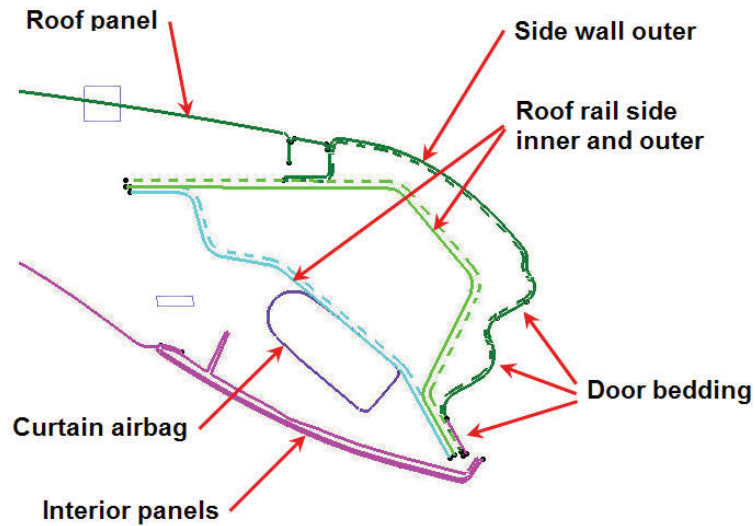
Package section 111 - Roof rail side with curtain airbag, interior panels, sidewall outer and roof (compare with figure 6.2) (Bode et al, 2010)
